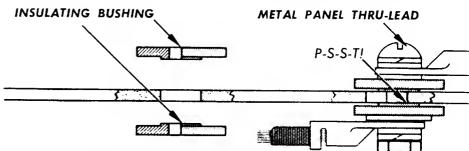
INFERIOR DESIGN: Small projection or shank allows bushing to easily slip out of hole in mounting plate. Also, note omission of the retaining nut "A" and lockwasher shown in Fig. 3.
